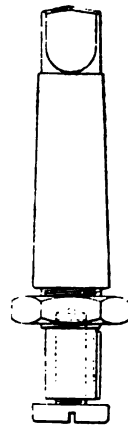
Shell Cutter Arbor, with Nut for Forcing off the Cutter.
